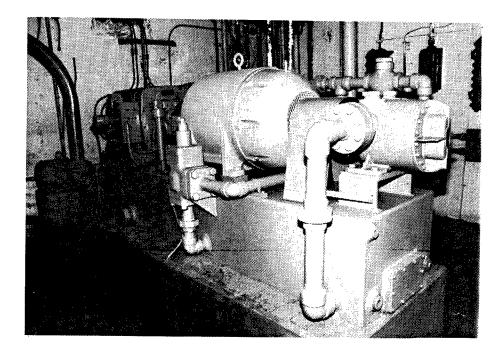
Building 6810-09: Thirty horsepower oil hydraulic pump to work extrusion press.
